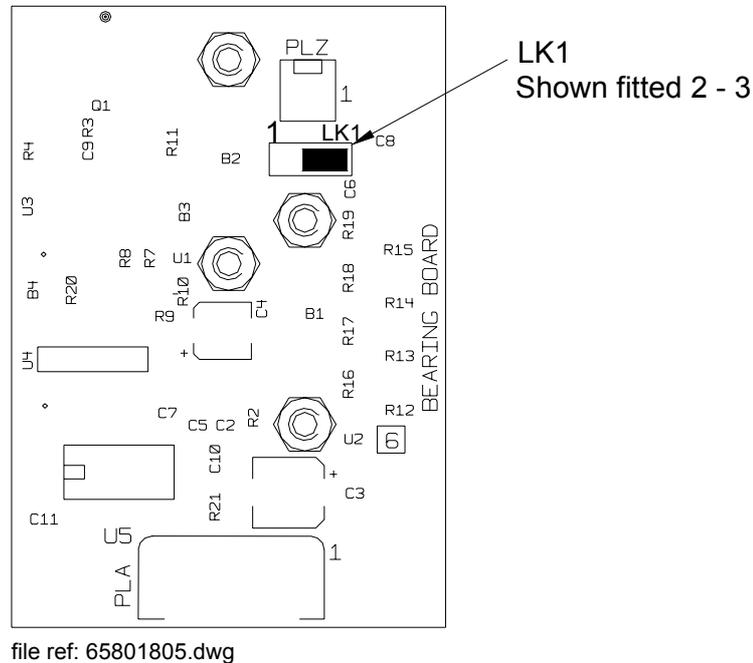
Pulse Bearing PCB Assembly 65801826
